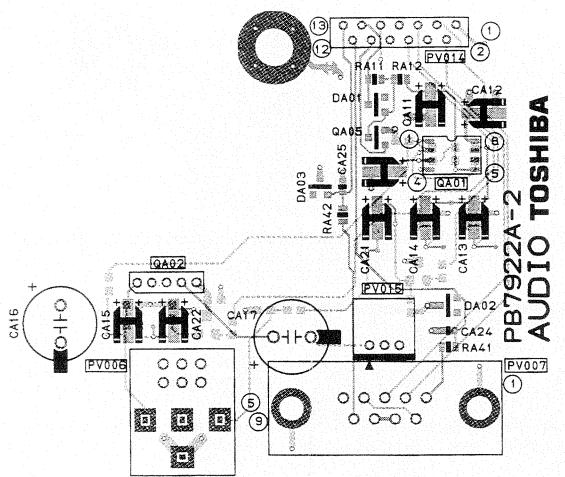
U0032 Audio PC Board (Top Side)
